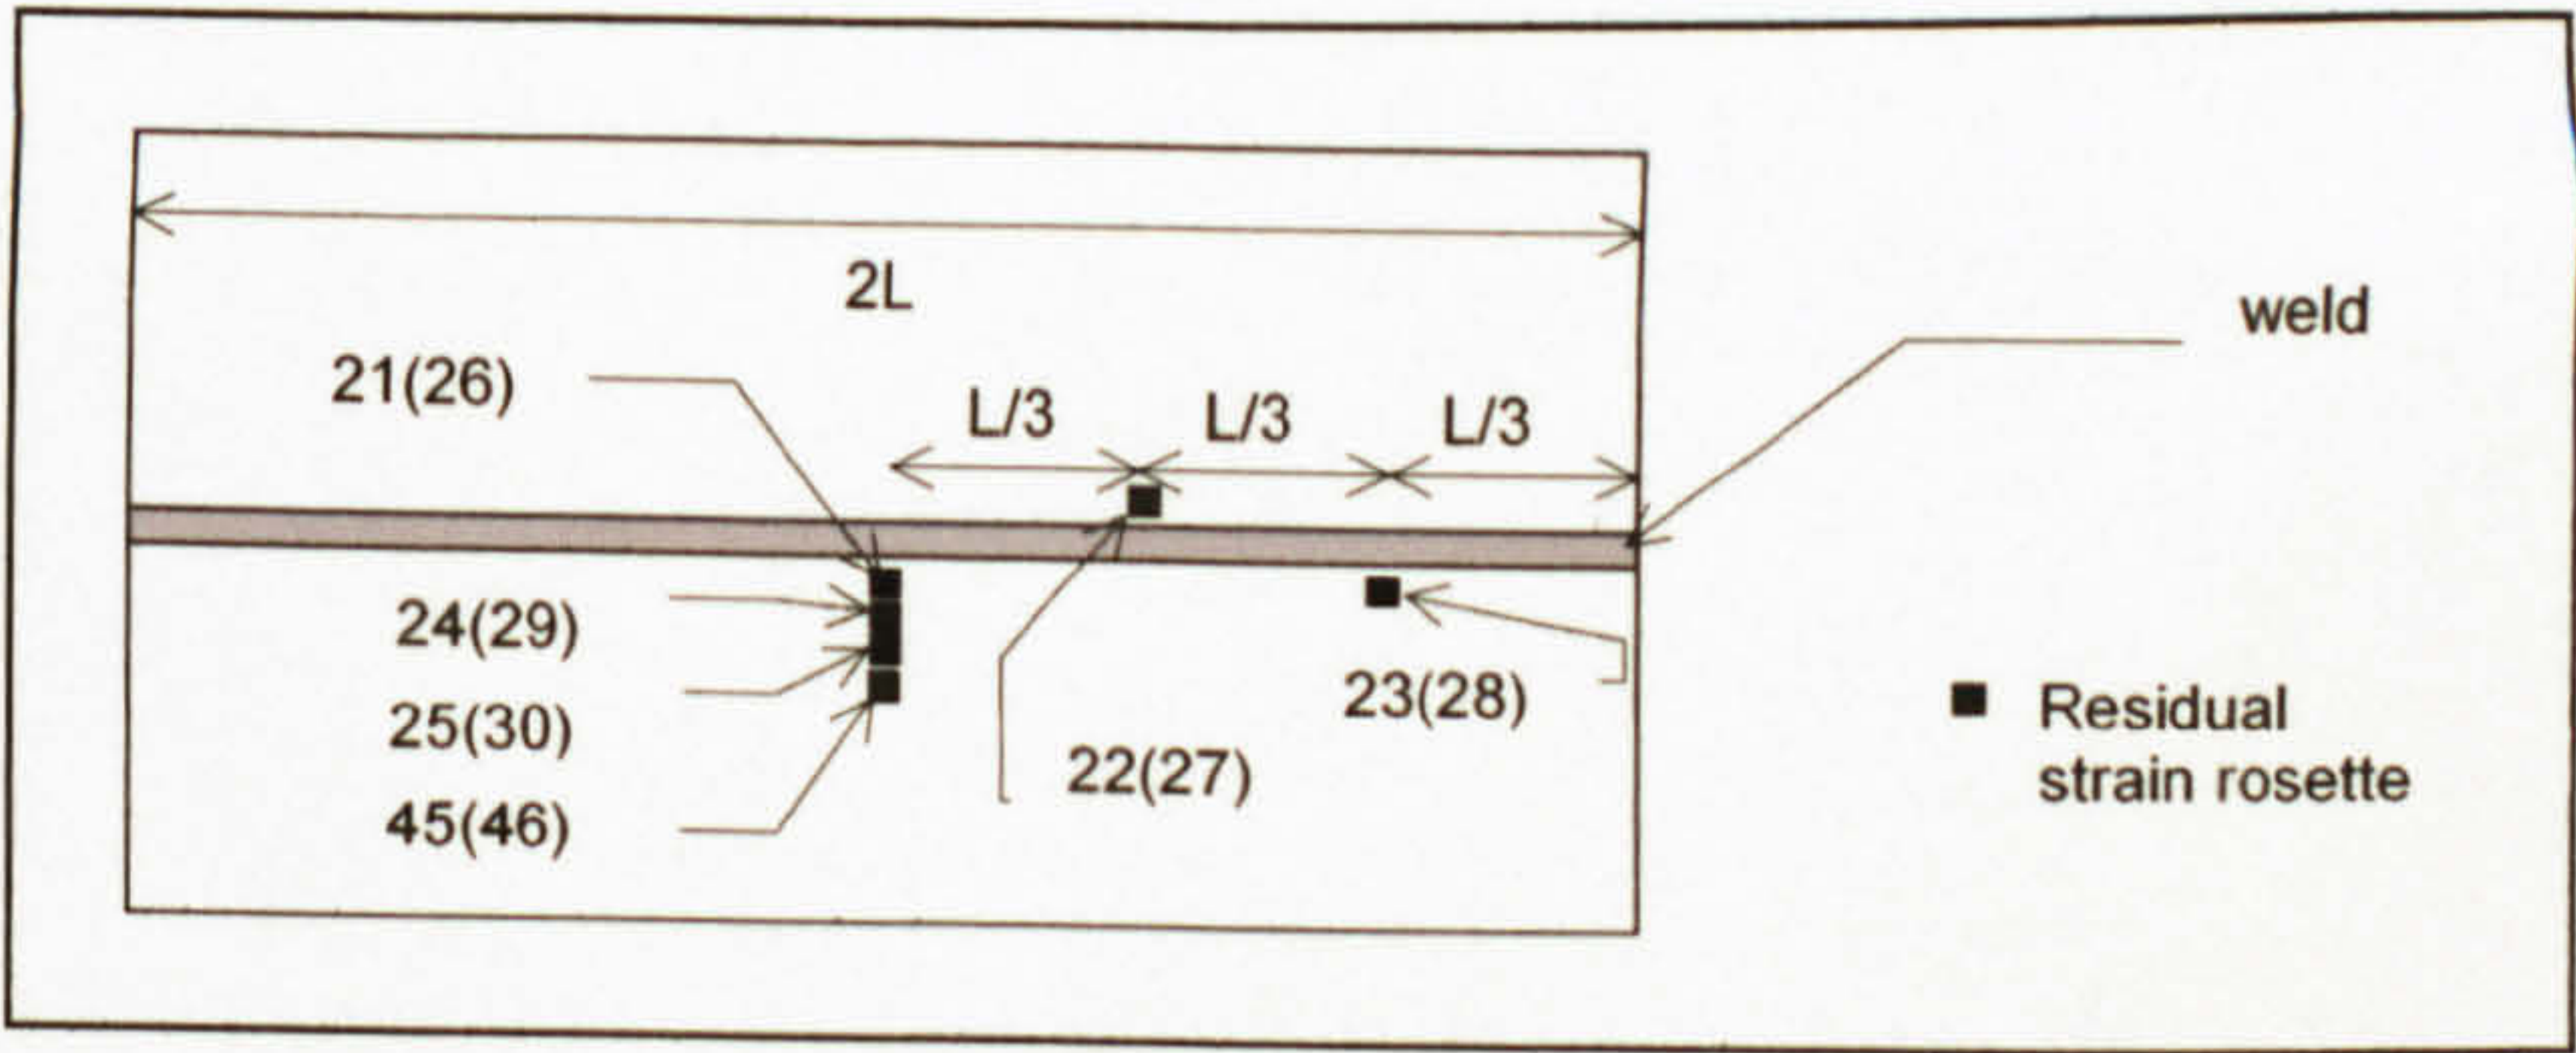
Position of residual strain gauge rosettes in relation to FS DP weld.
